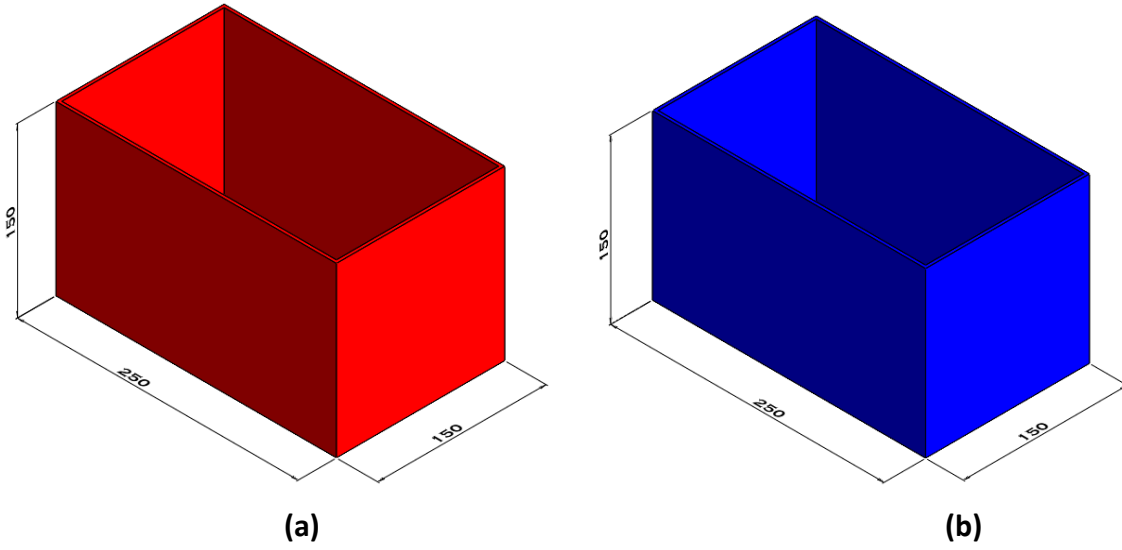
Plate dimensions (a-isometric b-Top view)
